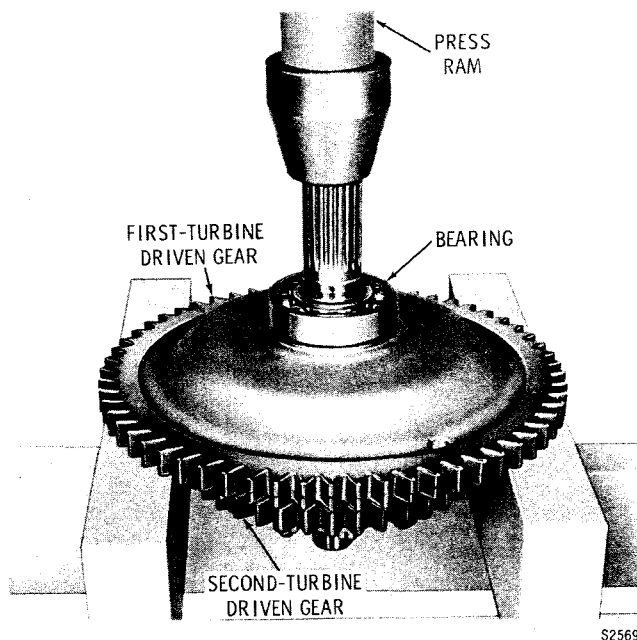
Pressing second-turbine driven gear assembly from freewheel clutch assembly
